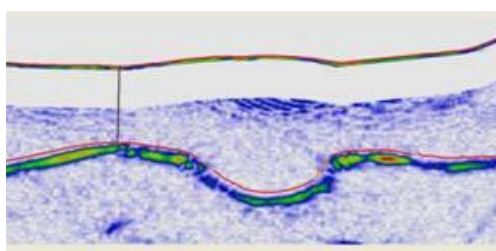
Lab specimen - abrupt cross section changes through weld region.
